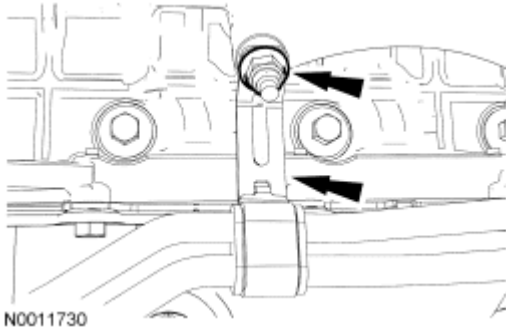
Locating Transmission Cooler Tube Bracket And Nut
